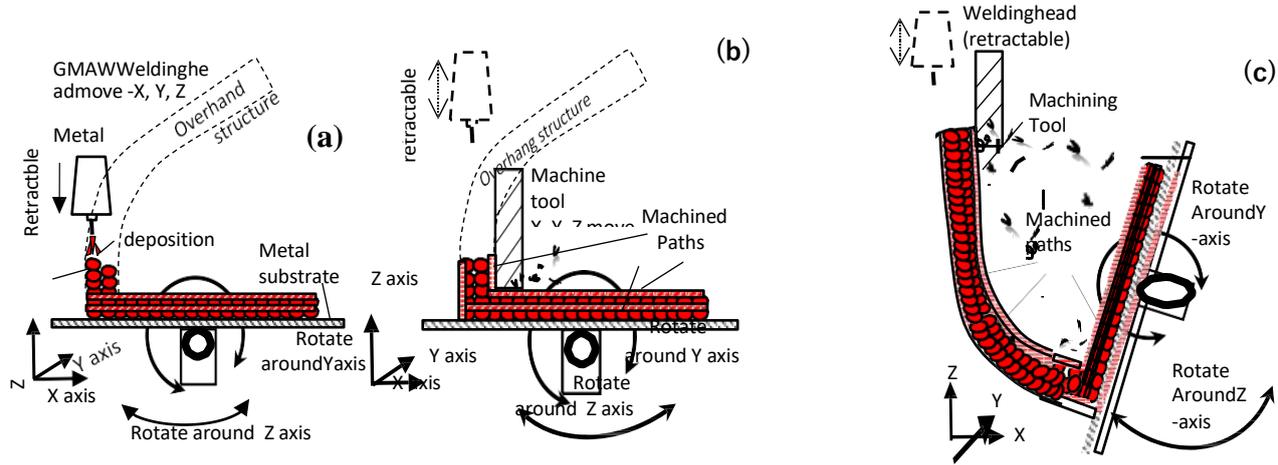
(a, b, c): 5 axis hybrid 3D printing-MIG welding deposition and CNC machining of overhang structure
